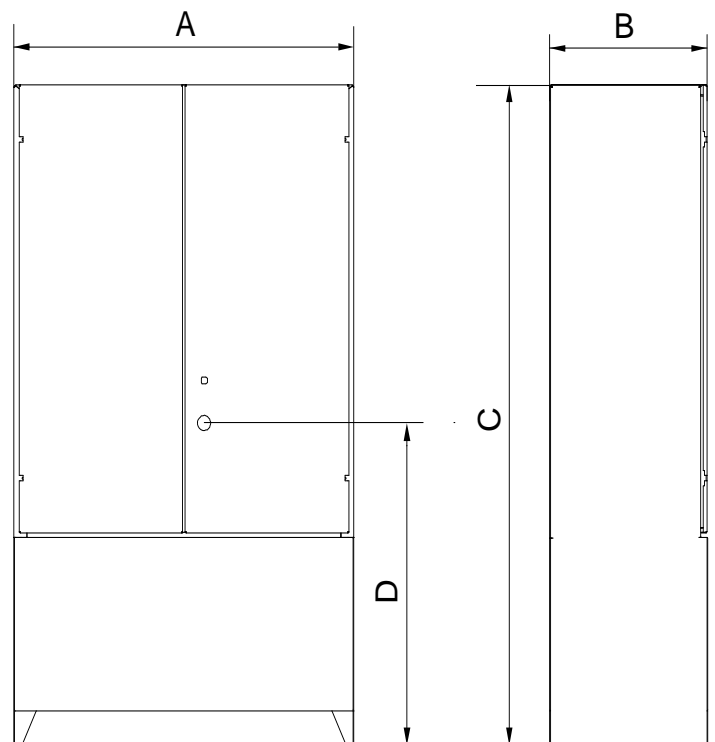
Dimension sketch for MRL cabinet VIDI
